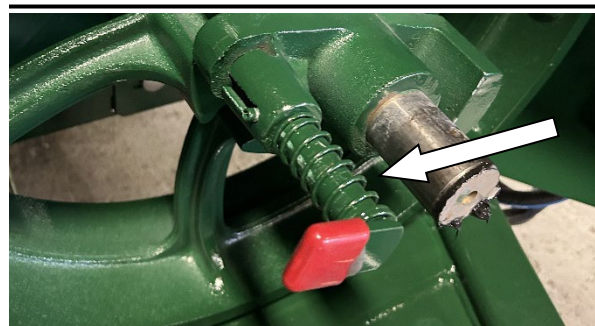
Hammer mill Clutch Pin (Pin Disengaged in Photo and Shields Removed for Clarity).
